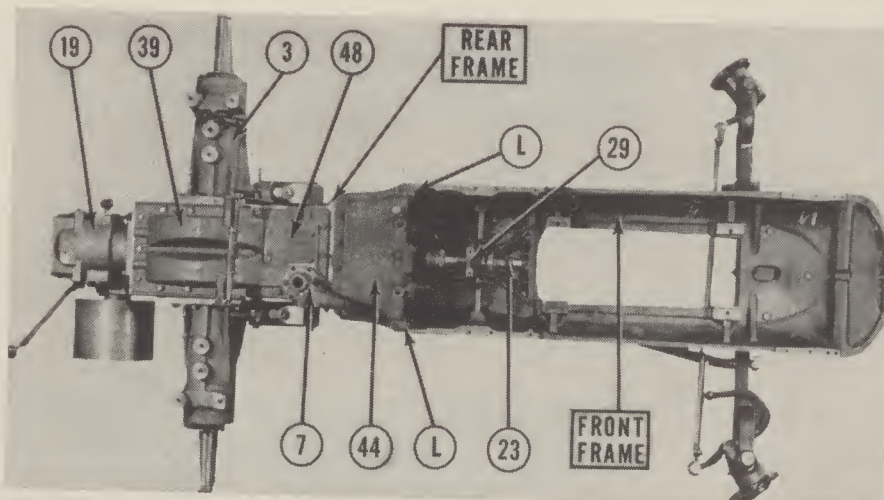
Top view Super 99 chassis with engine removed. Not shown are the clutch front cover located immediately forward of the transmission top cover (44), and the clutch dust cover which is located directly above support (29) to which it is bolted.
